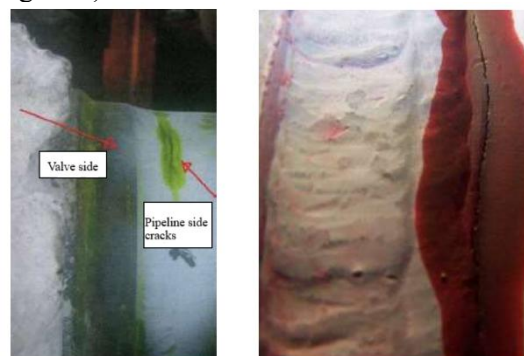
Inspection Results of Cracks Near the Weld Joint in the 800H alloy Pipeline (Right Image Shows a Close-Up View of the Crack)
